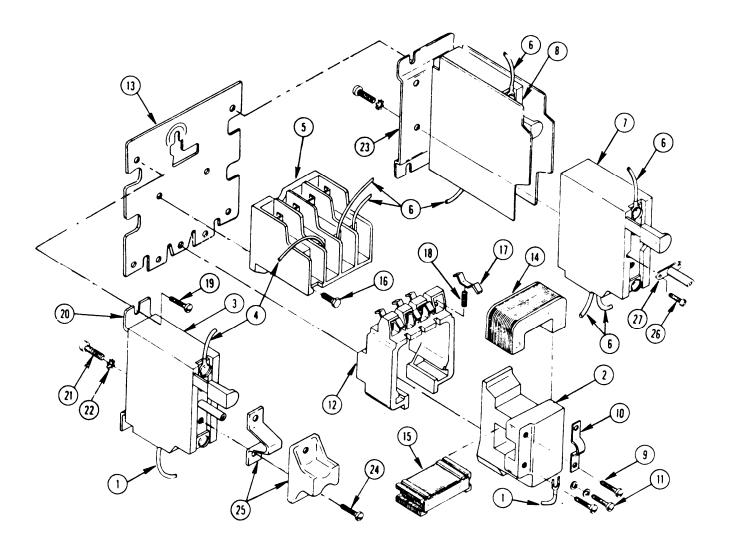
Motor starter, 1 HP and 1/3 HP
